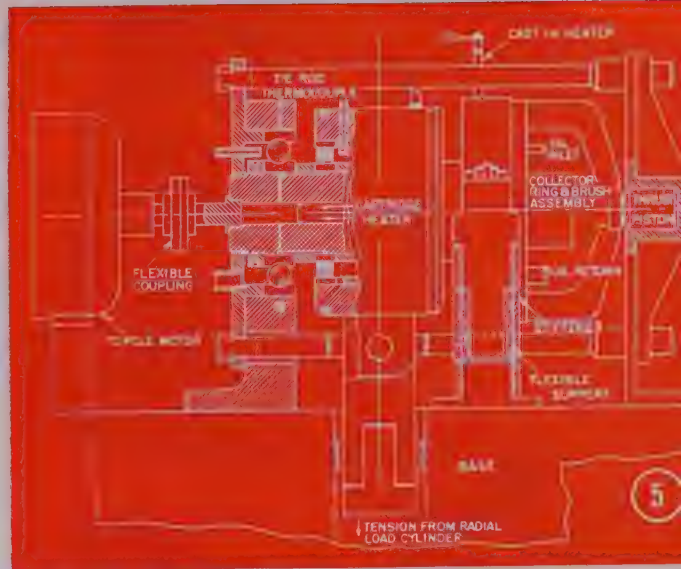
Diagrammatic section of test stand. This apparatus was built to provide test conditions variable over a wide range for both roller and ball bearings
